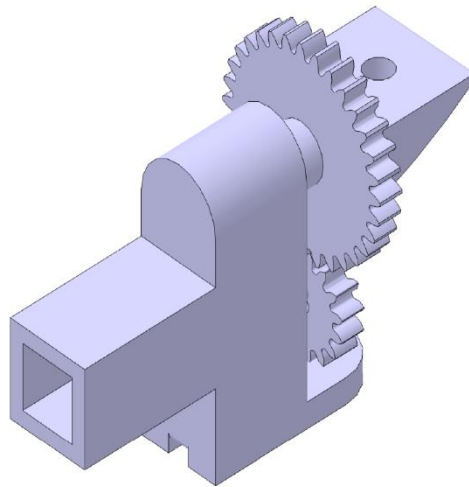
3 Initial Version of Gear Mesh Mechanism
